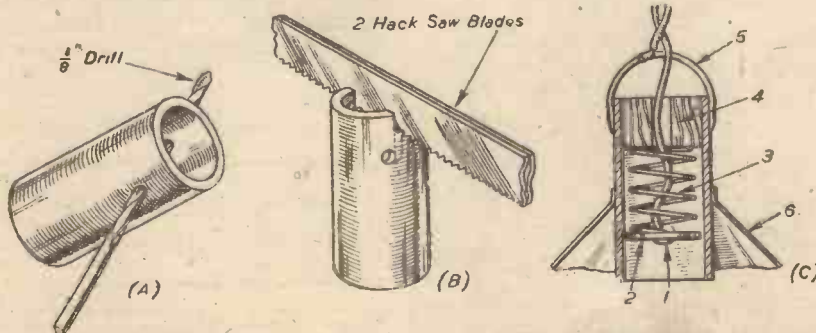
Two operations necessary to make a bayonet socket for car bulbs. (1) drill a 1/8 in. hole, (2) make two cuts, using two hack-saw blades.
